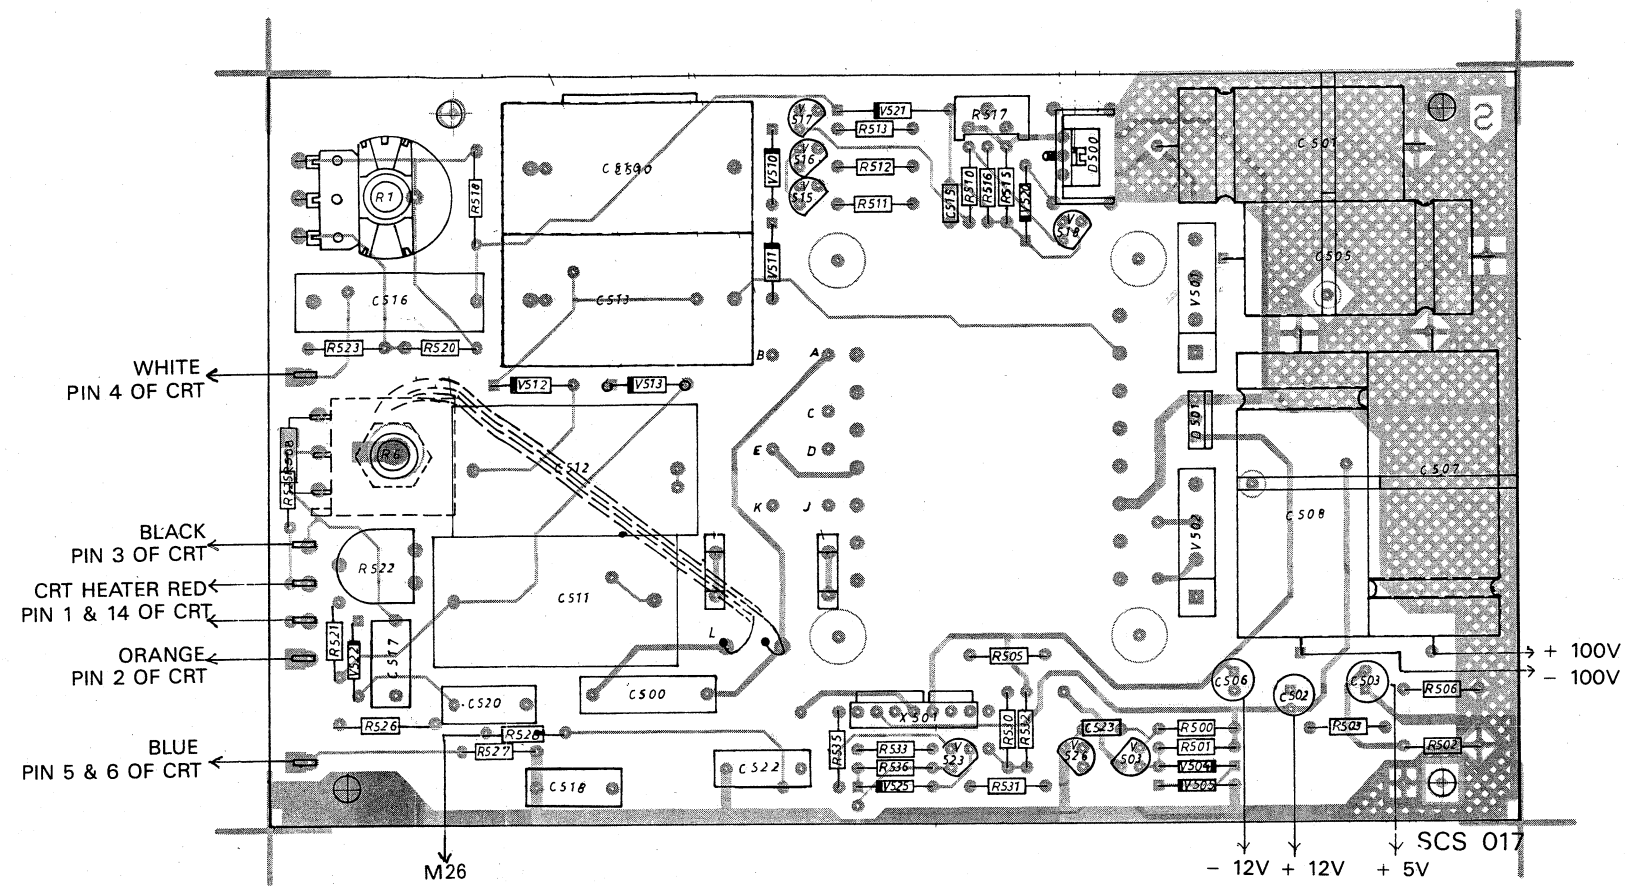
PCB OF POWER SUPPLY UNIT
